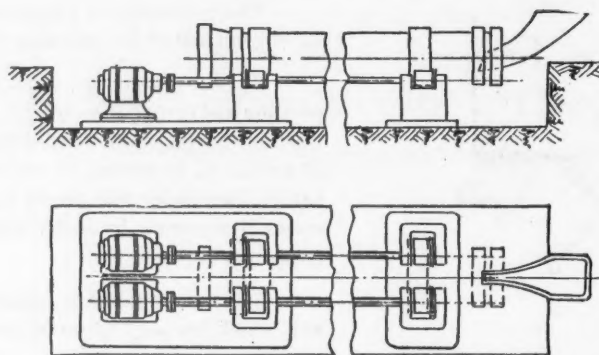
Machine for centrifugal casting of 300 mm-600 mm pipes.
